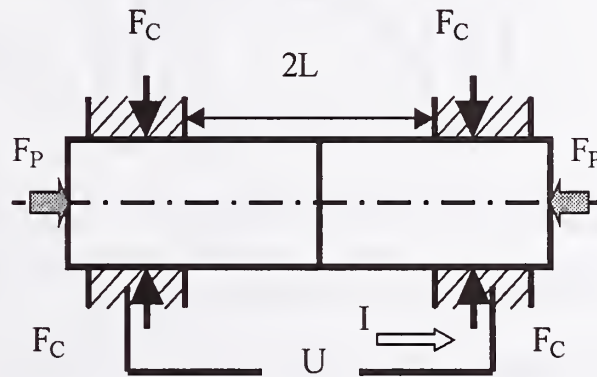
Sketch of resistance upset welding (F_P : Pressure Force, F_C : Clamping Force, $2L$: Initial extension of elements, I : Welding current, U : Voltage of transformer)
